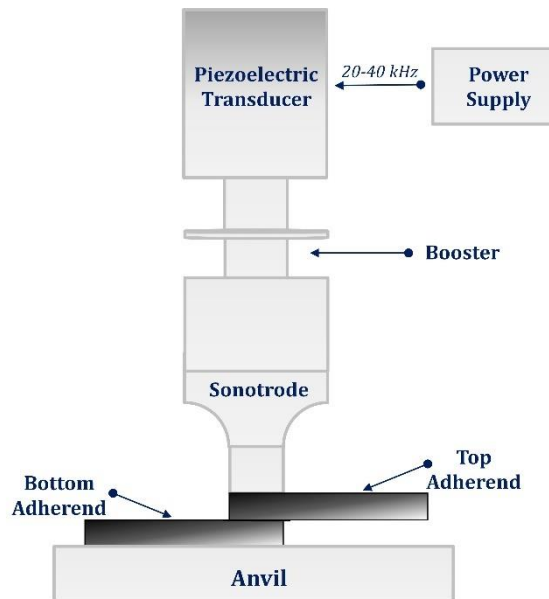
Ultrasonic Welding Machine. The schematic is adapted from [34].
